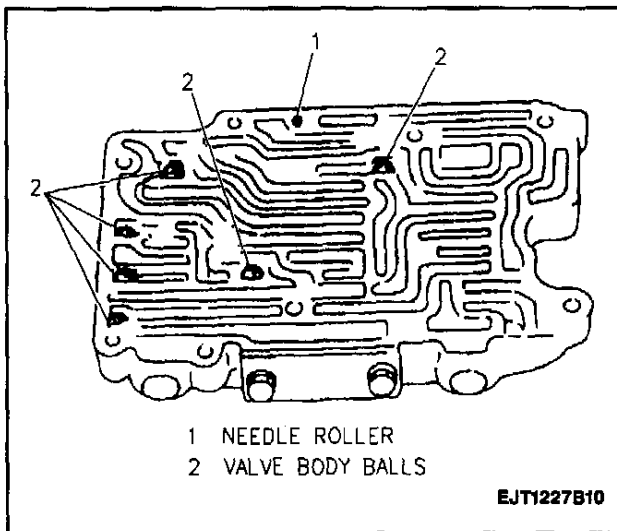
Valve Body Ball Location (03-72LE, 4-Speed)
